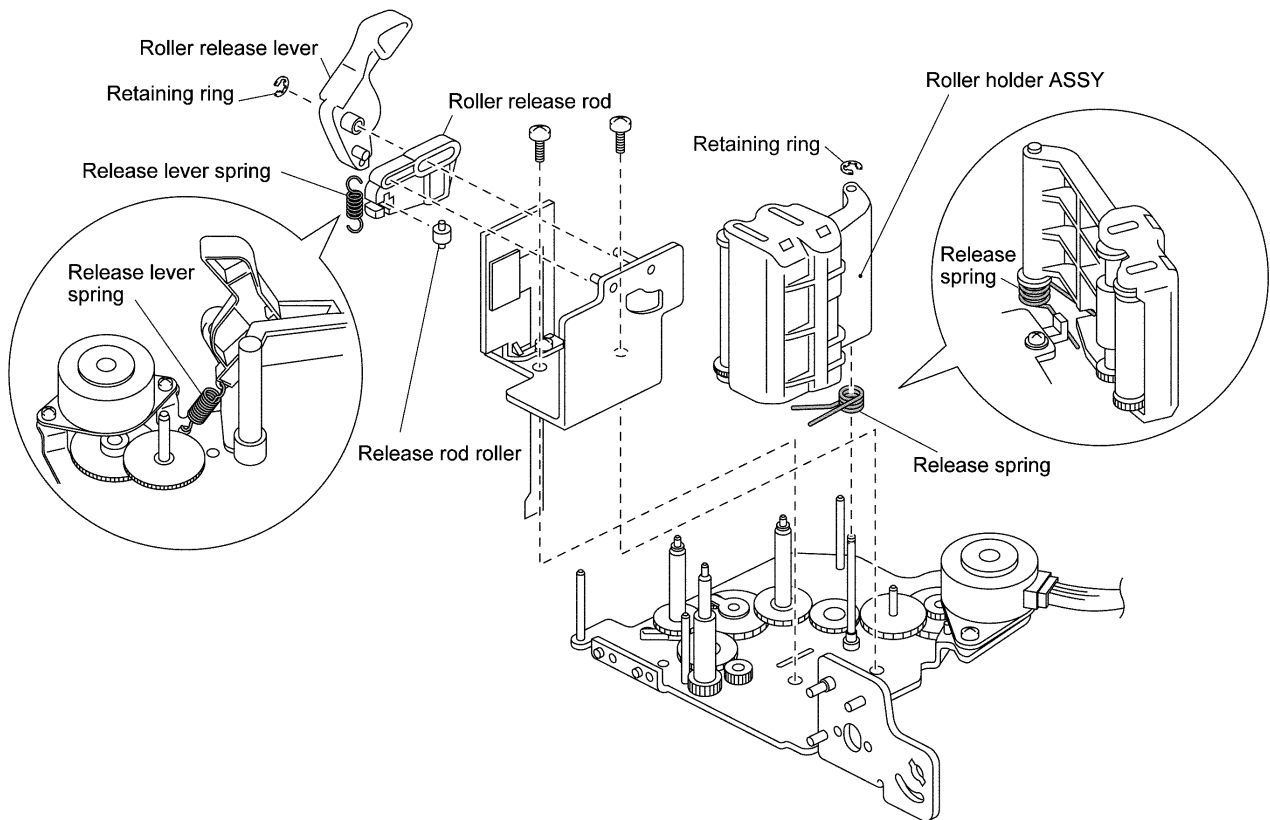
Installing the Roller Release Lever, Thermal Head ASSY, and Roller Holder ASSY
